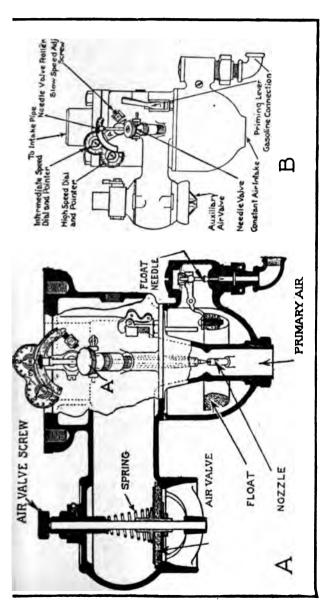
Views Showing Construction of Late Model Schebler Carburetor.
